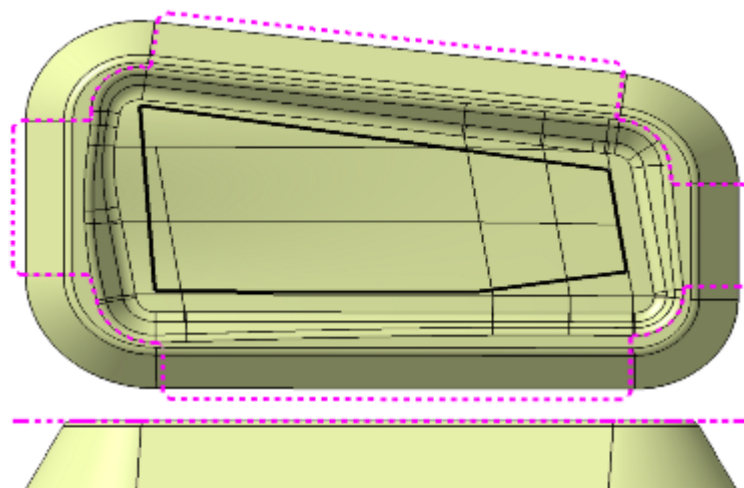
Concept-8 second stage tool and initial blank - top & side views
